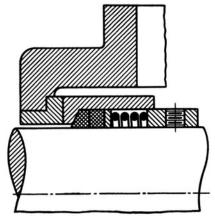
Cooke-type seal that embodies the patented principle of maintaining contact between the stationary and moving surfaces.
